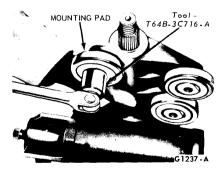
Removing or Installing Steering Gear Mounting Pads
